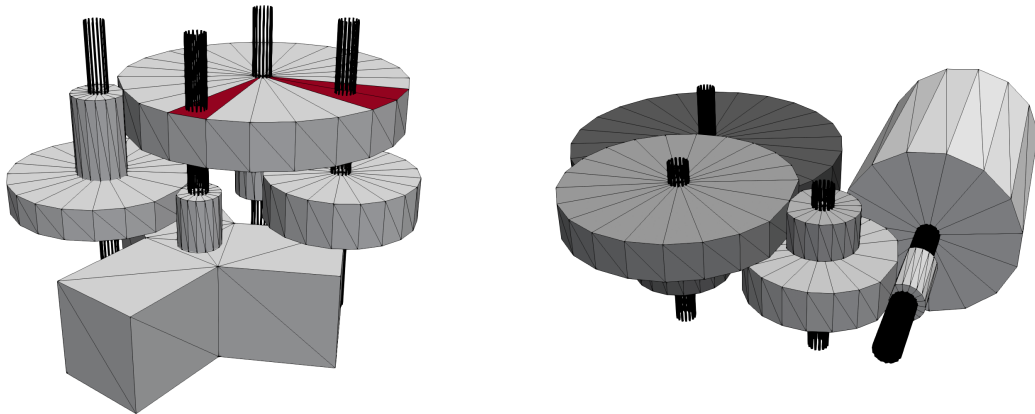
Illustrations of the method used to detect if shafts can be supported by the housing for two actuators. Collisions between the rays and gears not belonging to the corresponding shaft group are shown in red.
